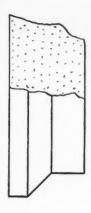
Face of grinding wheel may be trued to a fairly complicated form as shown in this drawing.
